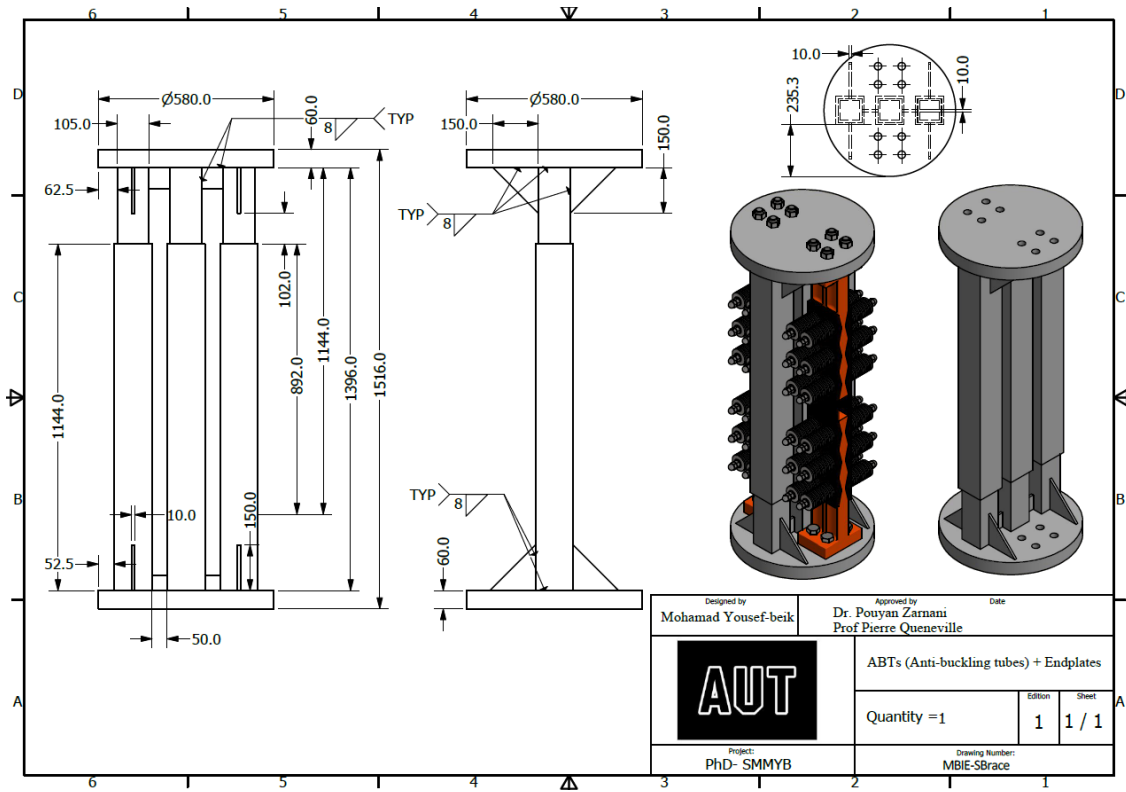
drawings and dimensions of Anti-buckling tubes with their end plates
